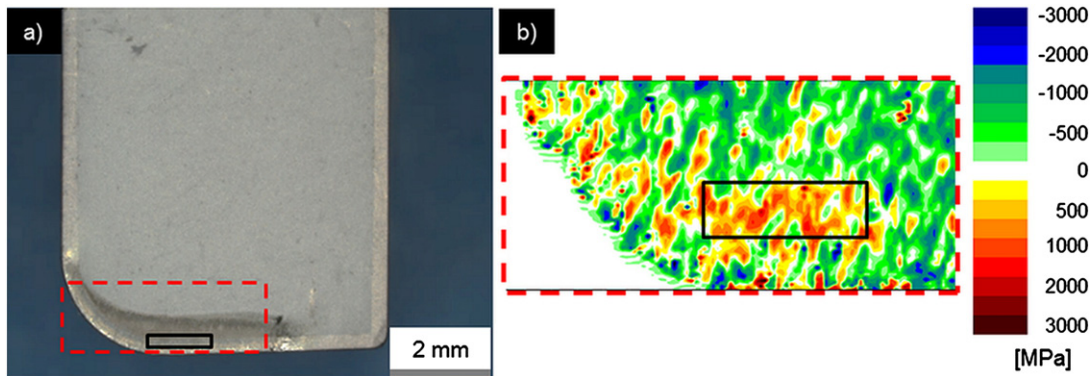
Results of stress measurements via synchrotron X-ray radiation taken from [4]. Top view of the rake face of a used milling insert with 1000 tool–workpiece contacts. Dashed frame in a) indicates the area of residual stress measurement shown in b) that represents a position resolved map of residual stress acting in horizontal direction in the WC phase. Solid frame in b) indicates the area with detected significant tensile residual stress buildup [4].
